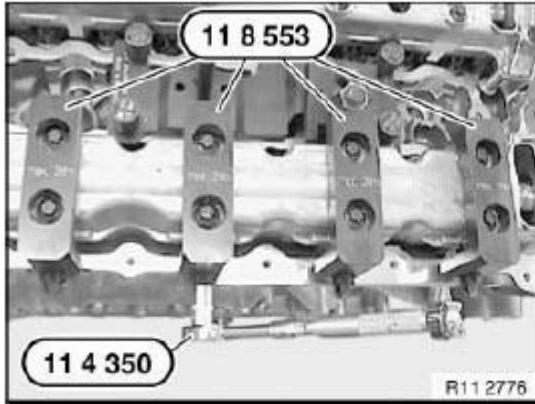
Identifying Special Tools (11 8 553, 11 4 350)
